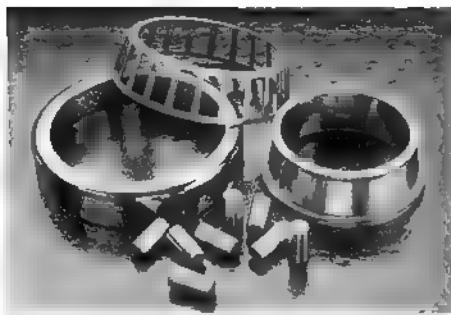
The components that make up a single-row tapered roller bearing. Photo courtesy the Timken Company.
